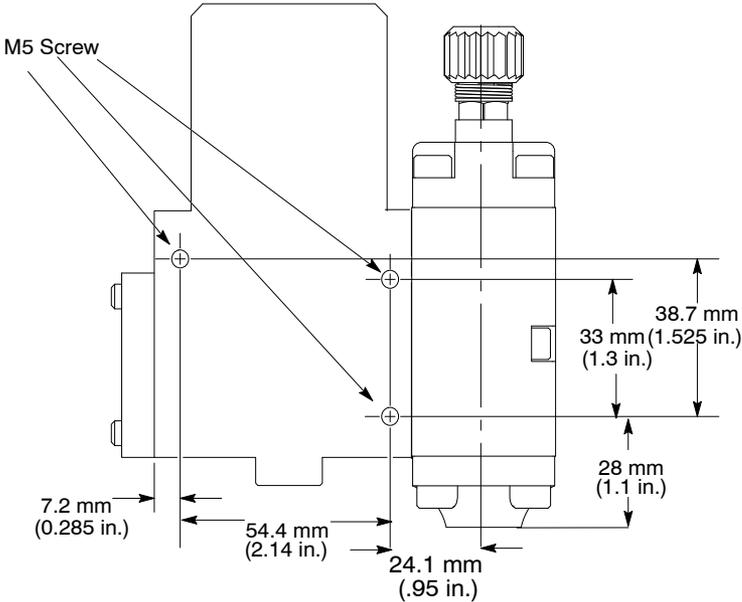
Mounting Dimensions for AG-900+/AG900+S Applicator with Regulator
